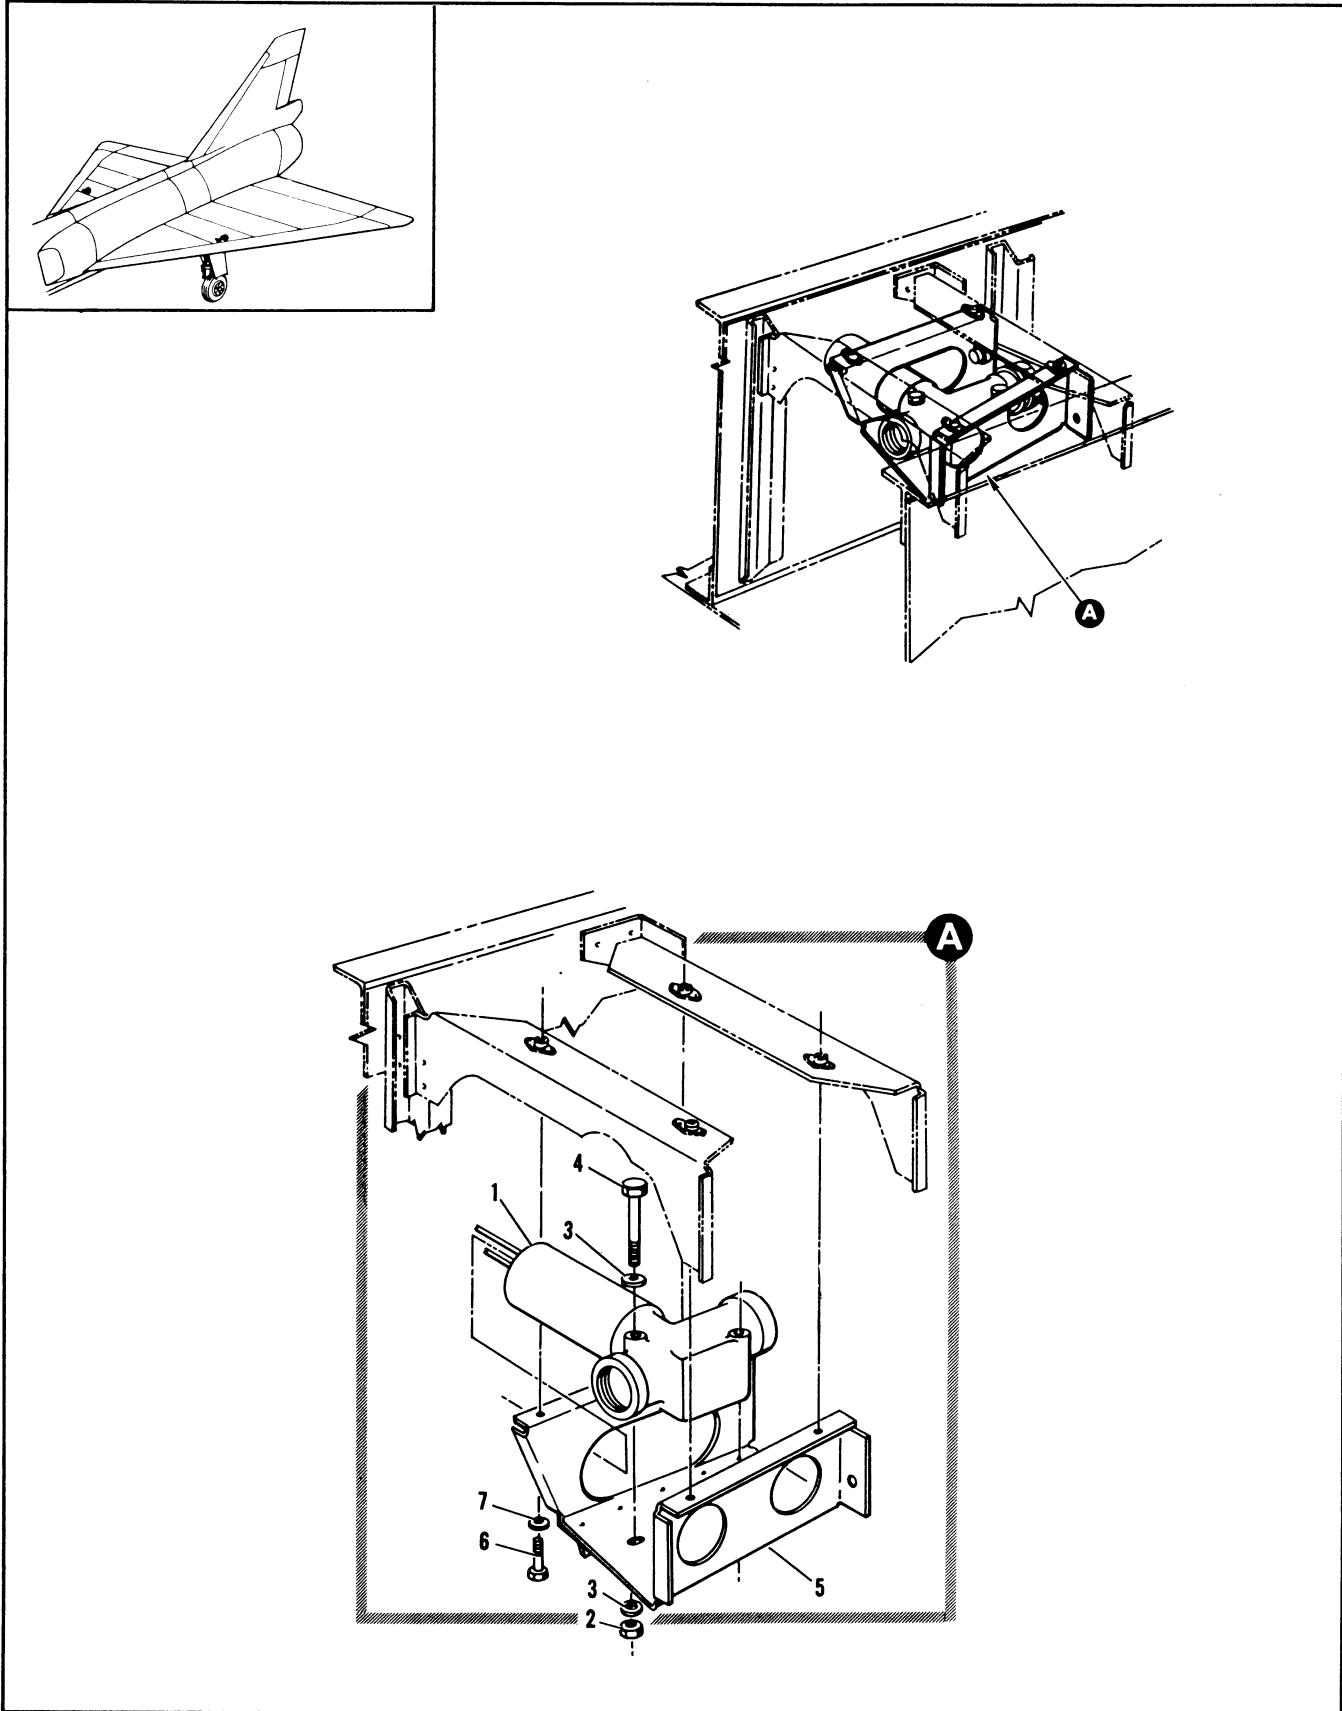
External Tank Shutoff Valve Installation Sta 442 to 450
